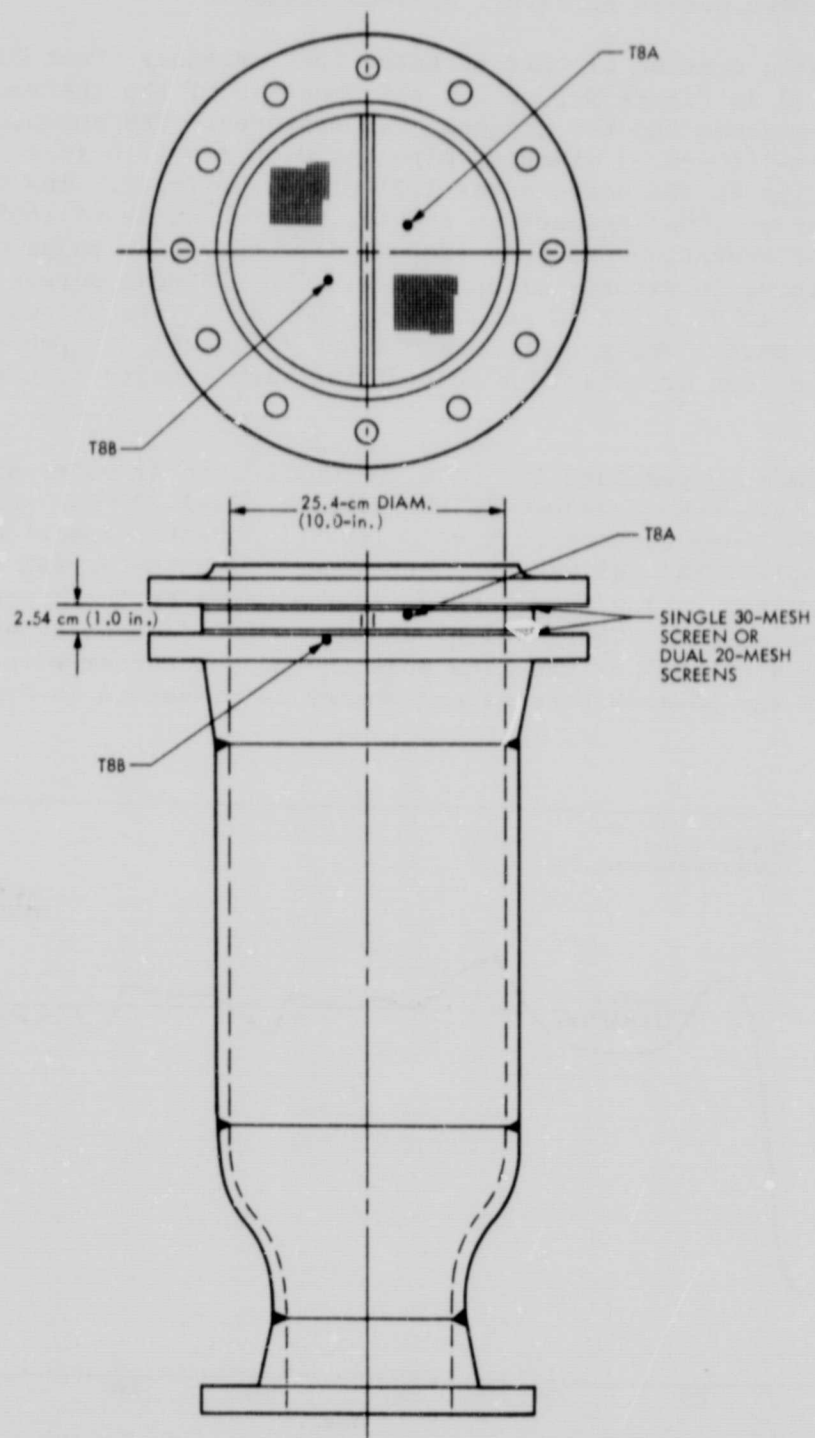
Screen-Type Arrestor Test Assembly, 25.4-cm Diameter, Schematic Drawing
